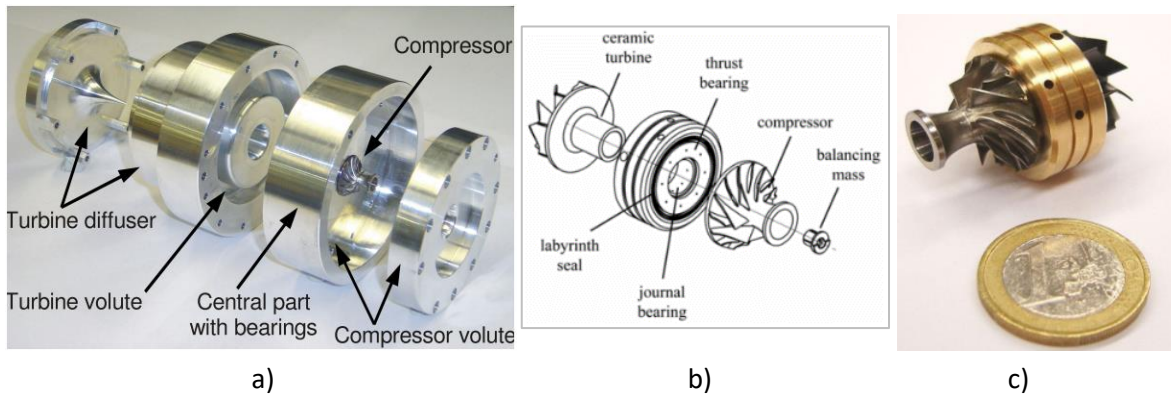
a) Turbo-shaft setup. b) Schematic view of the compressor and turbine. c) Compressor (left), turbine (right) and air bearing insert (Rotor diameter: 20 mm- Size compared to 1 euro coin) [81].
